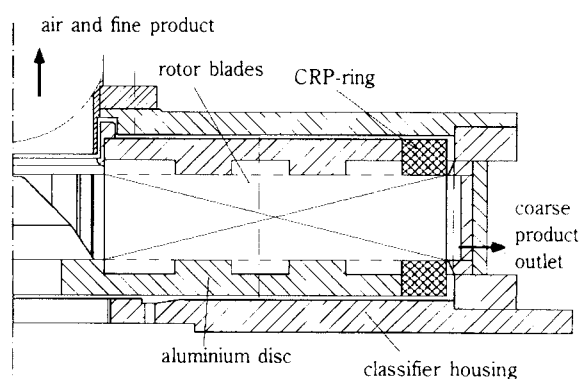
Sectional view of the Clausthal Impeller Wheel Classifier
